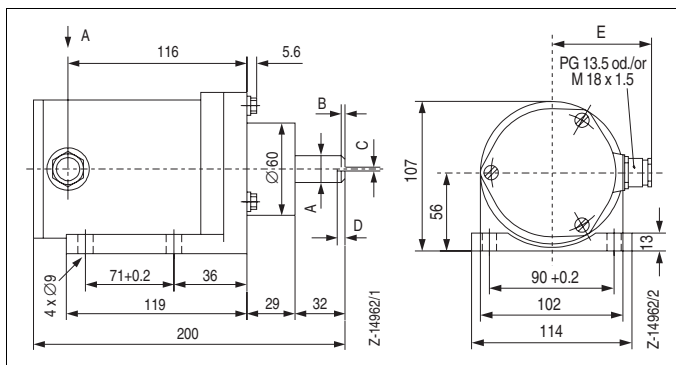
Dimensional drawing of TGM5 (-Ex) with foot mounting
